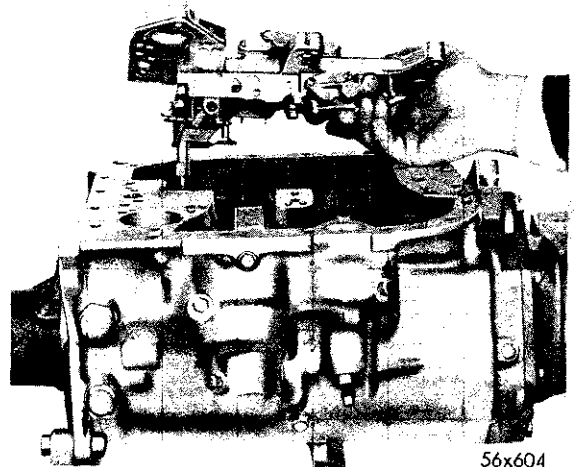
Removal and Installation of Valve Bodies and Transfer Plate Assembly (Typical View)
